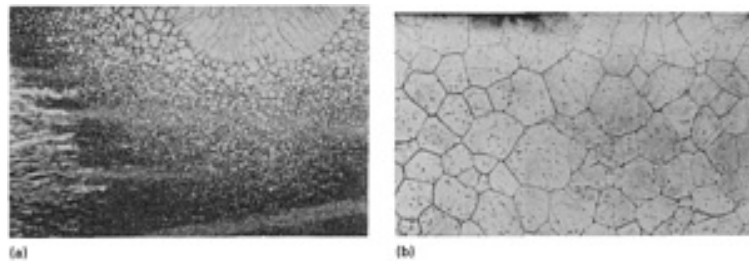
CROSS SECTIONS OF PARTIAL PENETRATION GAS-TUNGSTEN ARC WELDS IN HIGH-PURITY FE-28CR-5MO FERRITIC STAINLESS STEEL. (A) WELD IN WARM-ROLLED SHEET. (B) WELD IN SHEET WHICH WAS PREWELD ANNEALED AT 1040 °C (1900 °F) FOR 60 MIN. ETCHED IN 40% NITRIC ACID ELECTROETCH. 11×
